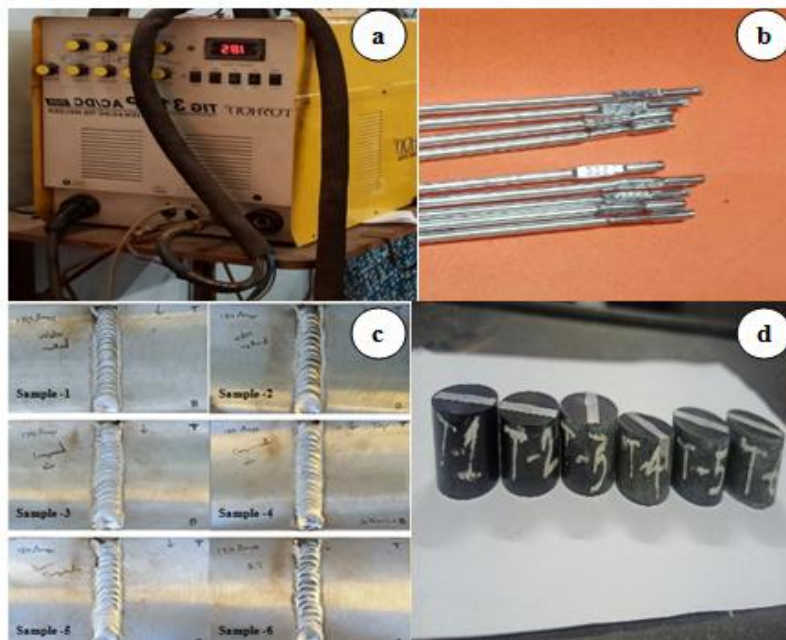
a) Welding Machine, b) Filler Rod, c) Weld Samples, d) Molded Samples
